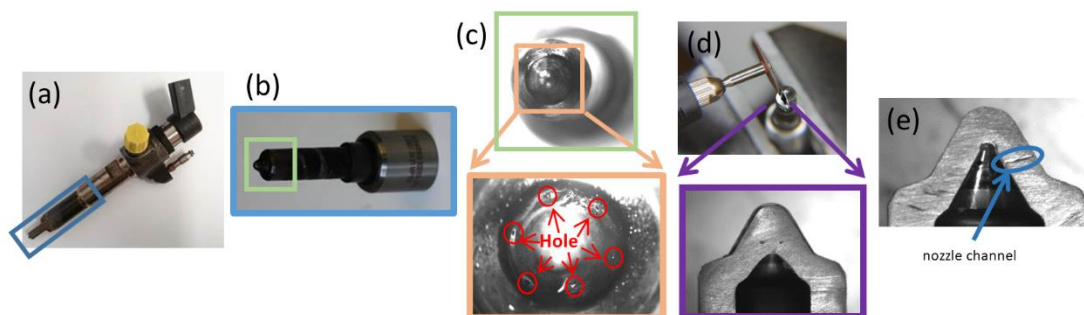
Sectioning of Injectors (a) a 'CD DU' injector. (b) The enlarged view of the injector head as highlighted in the blue box in (a). (c) a close top view of the injector head and the inset shows the enlarged view of the top view of injector head for which the locations of nozzle holes are marked in red circles. (d) The second cut on the injector head along the axial direction using a mini silicon carbide
